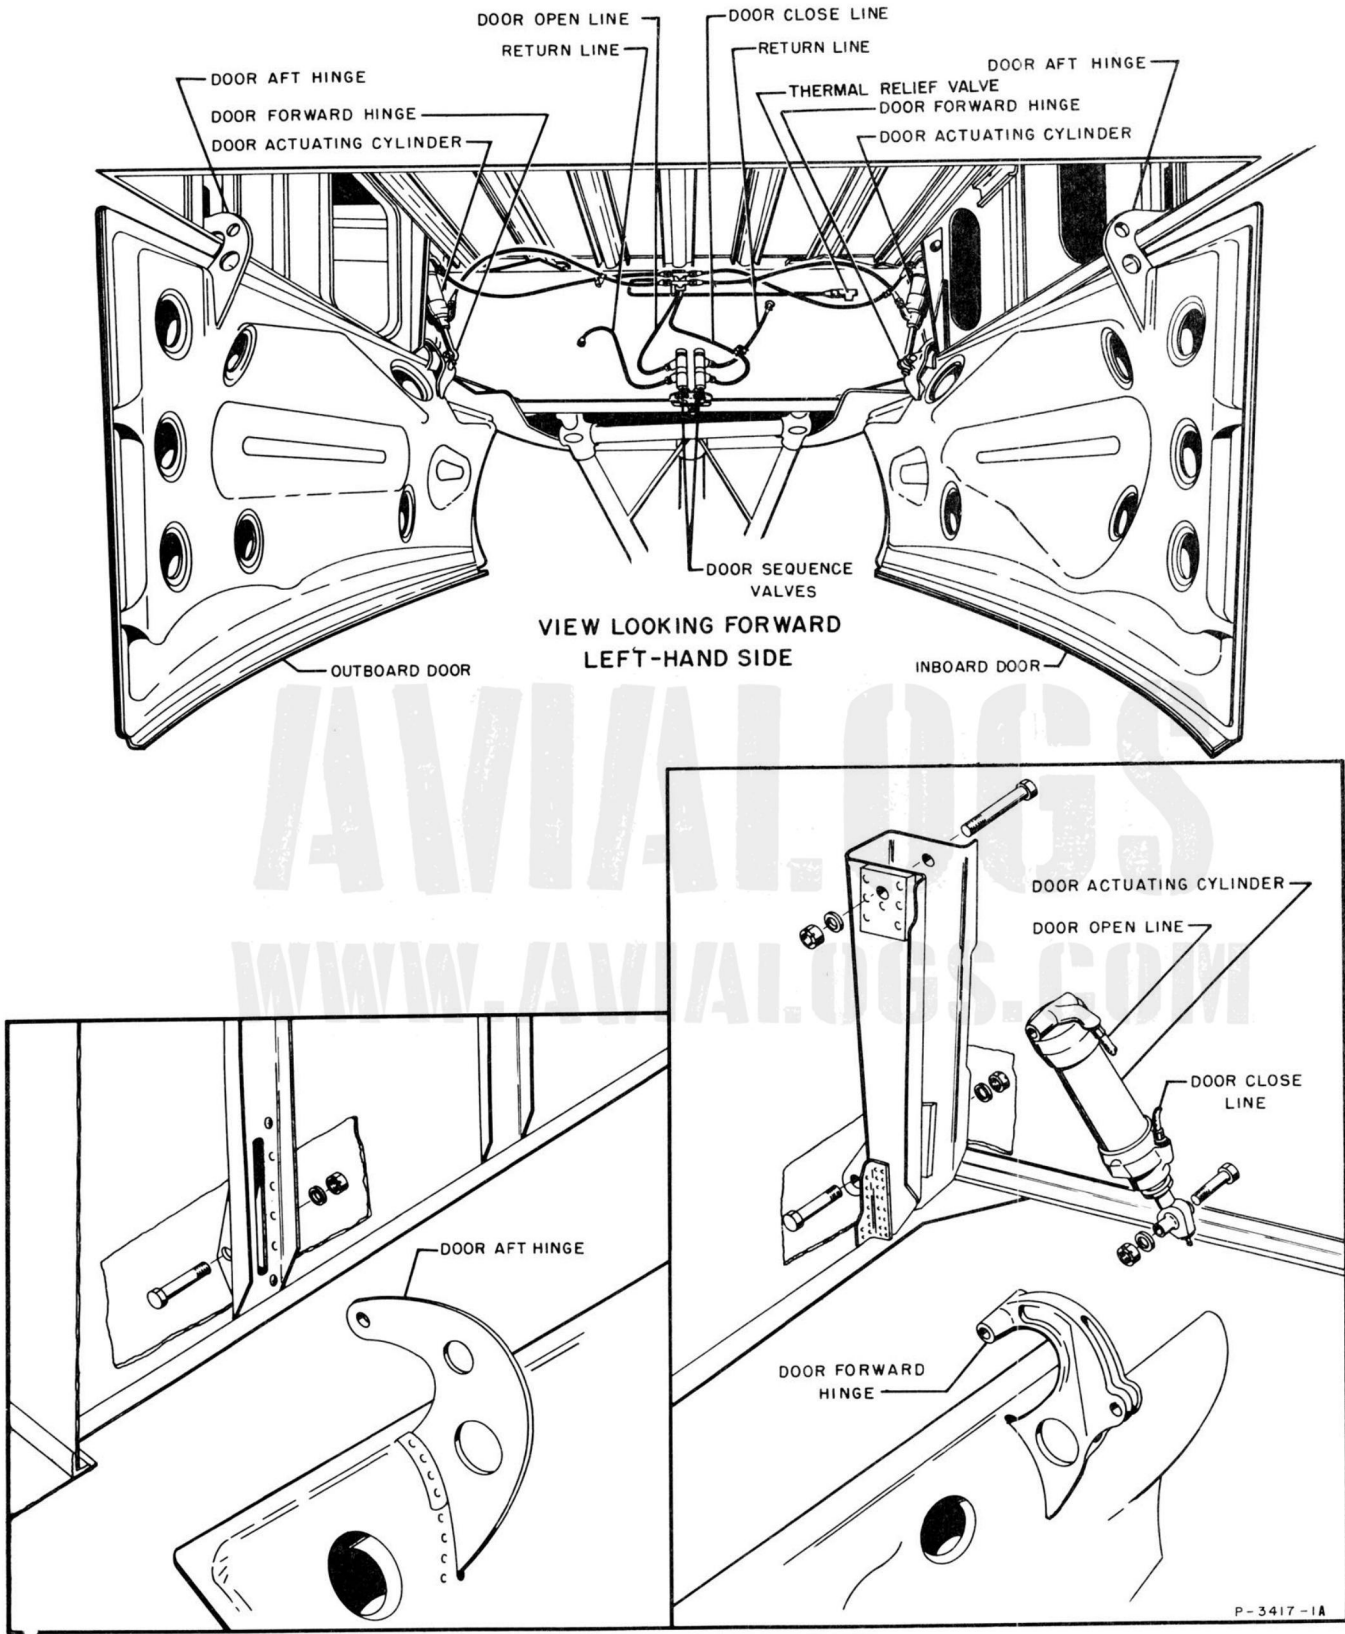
Main Landing Gear Door Installation and Adjustments (Sheet 1)
